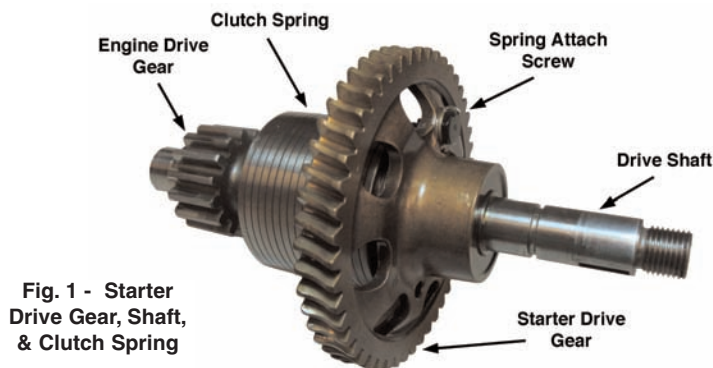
Starter Drive Gear, Shaft, & Clutch Spring
